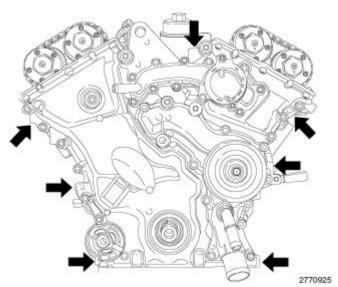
Timing Cover Removal Pry Points Courtesy of CHRYSLER GROUP, LLC
